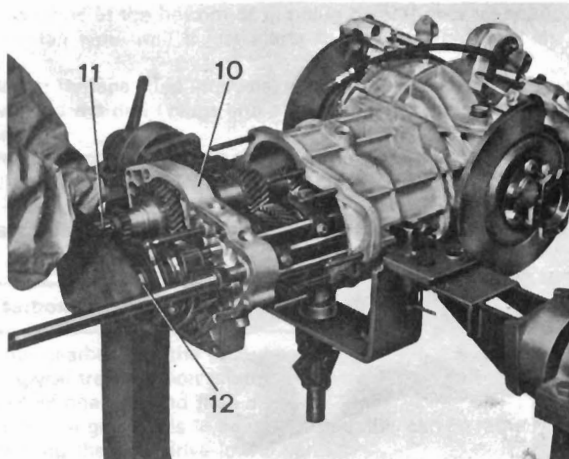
Withdrawing the intermediate flange and geartrains (Sec 6)
